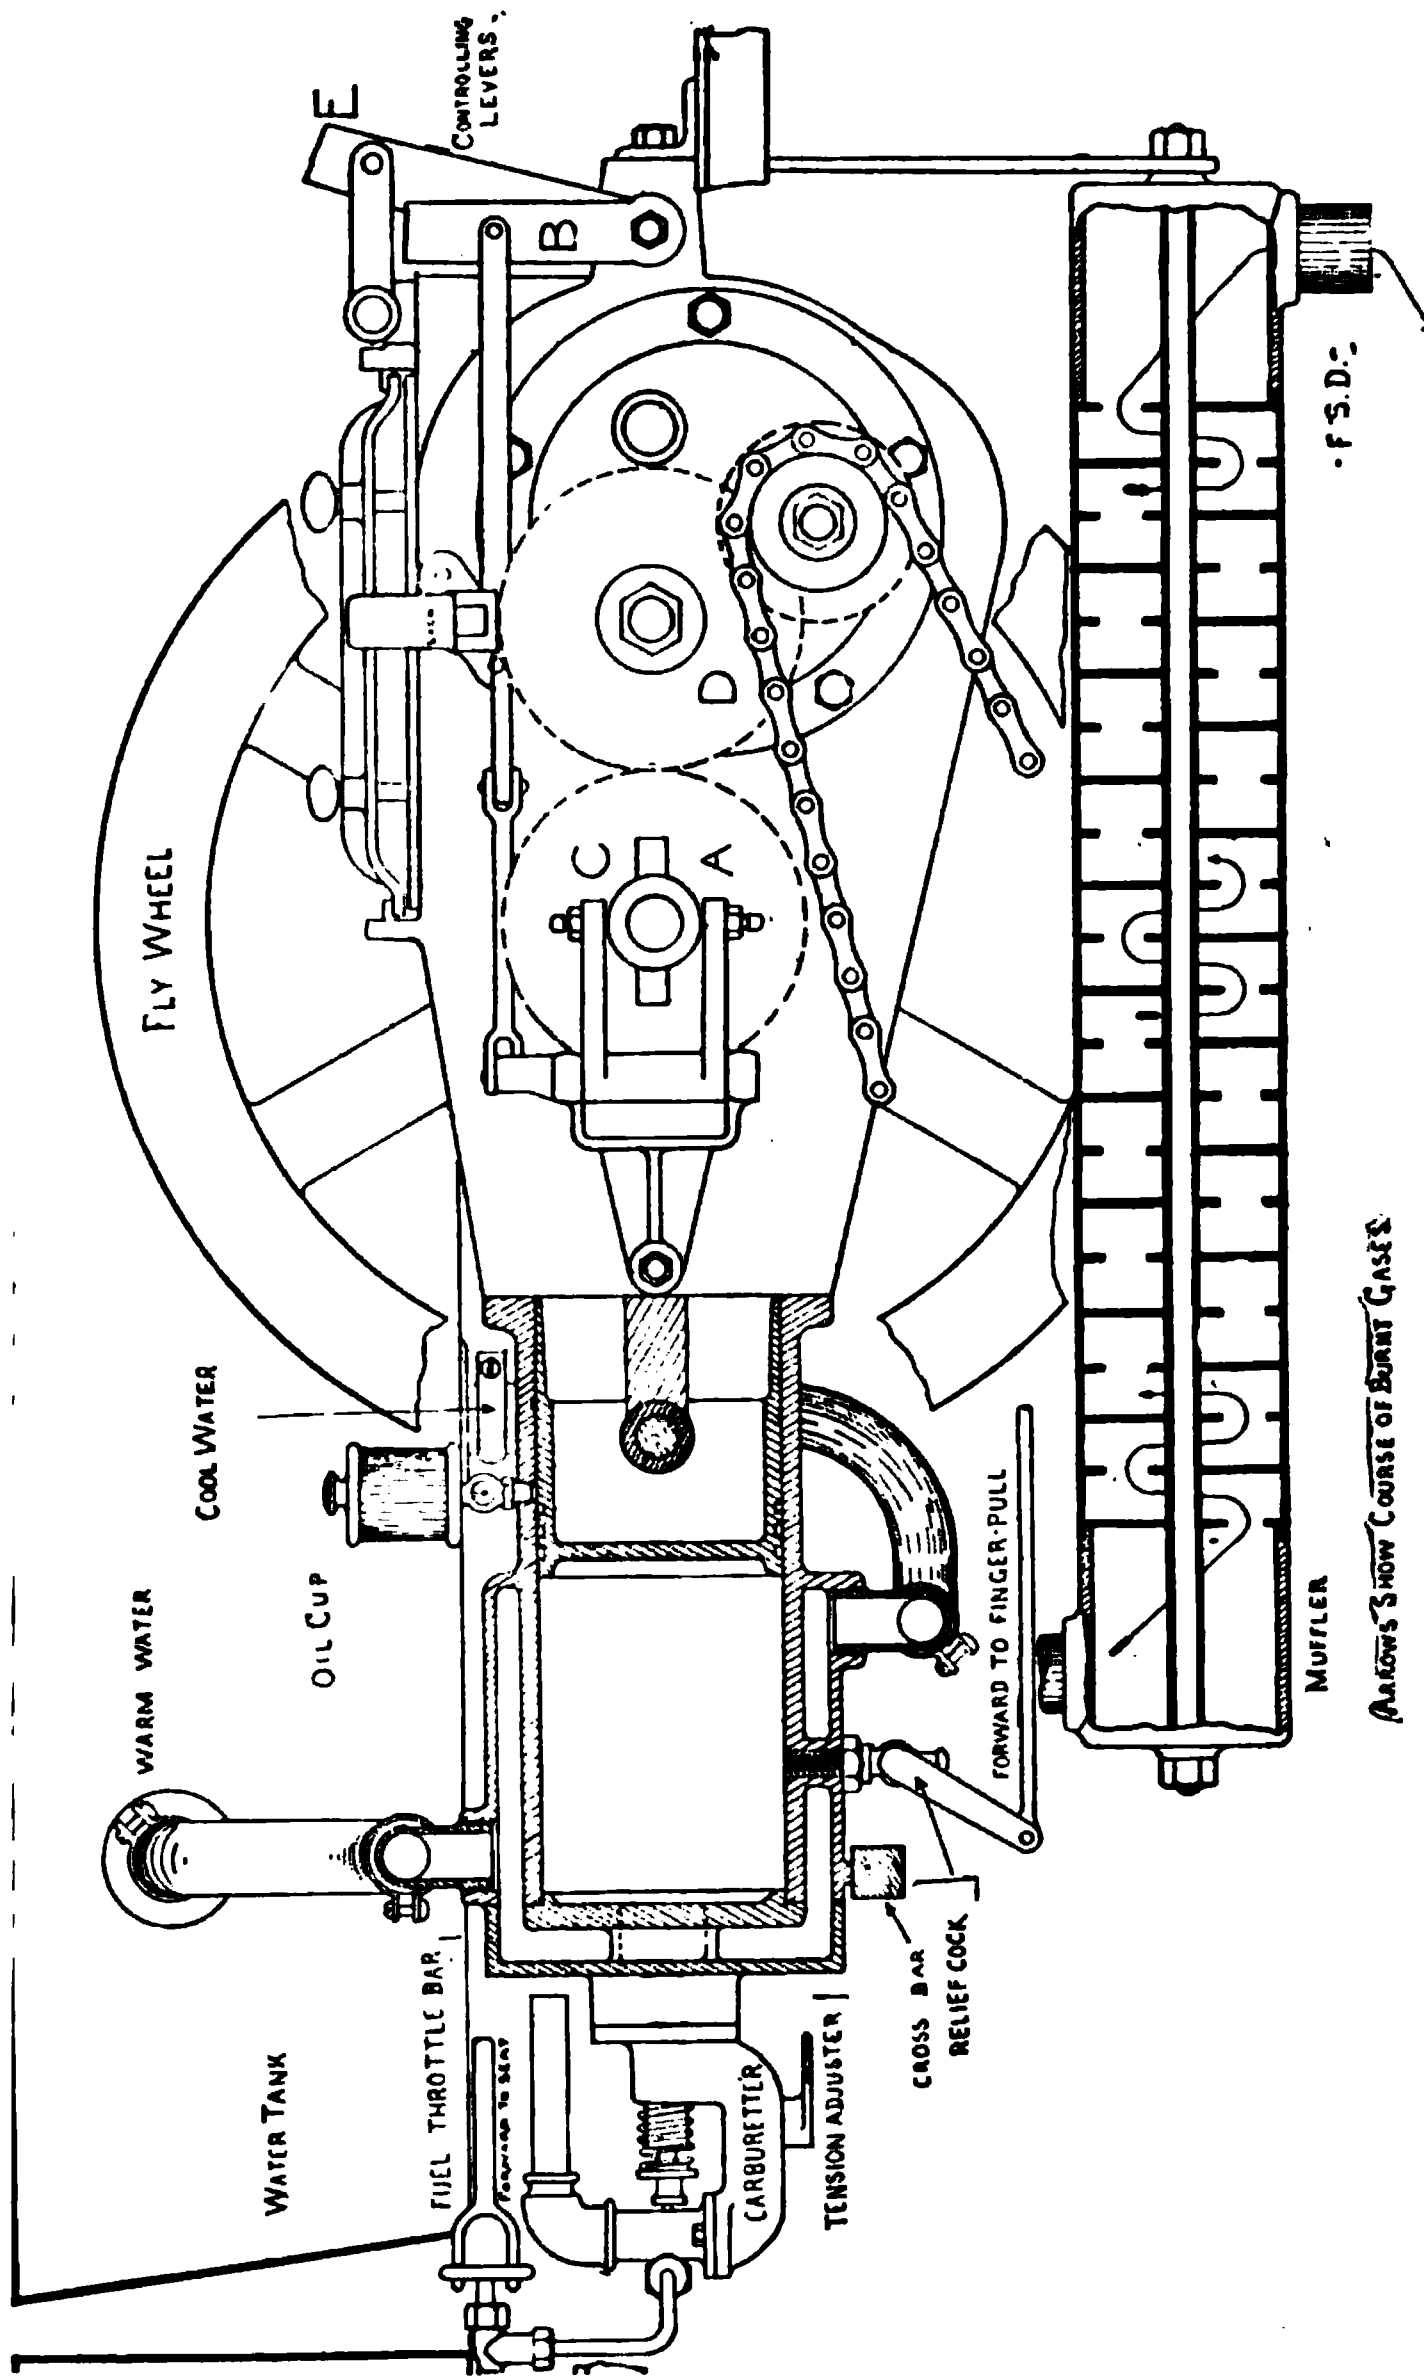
Diagram of the Motor and Mechanism of the St. Louis Gasoline Carriage, showing working parts in position. A is a spur wheel on the main shaft, meshing with spur, D, on the second motion shaft; B is a lever for operating the clutch C, thus connecting A rigidly to the main shaft and enabling its motion to be transmitted to spur D on the counter-shaft; C is a friction clutch, connecting spur A rigidly with the main shaft; E is a lever operating the variable speed by sliding the speed changing gears on the second motion shaft. It is connected through a bell crank with a double-faced sliding gear, as shown in the cut of the engine.
